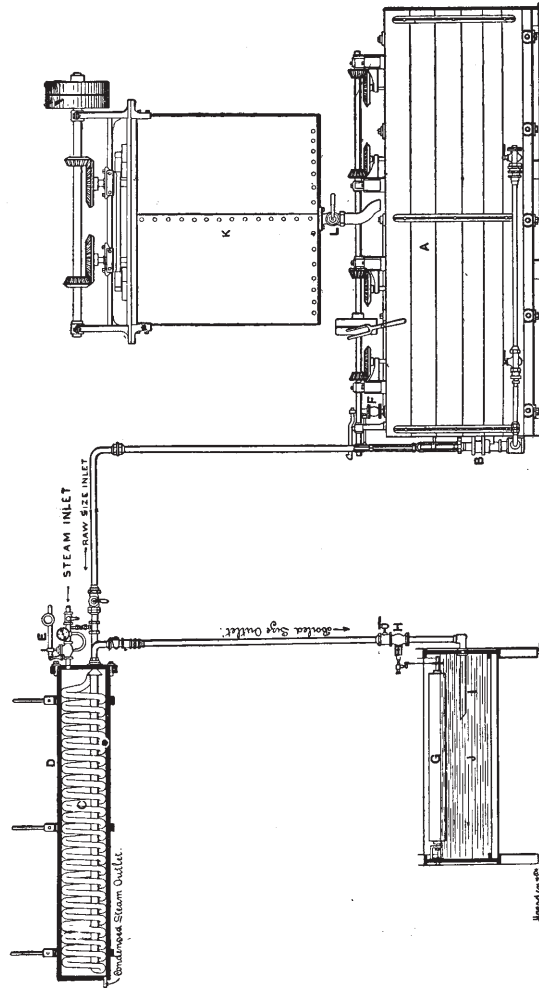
MECHANICAL SIZE MIXER AND COIL BOILER.
